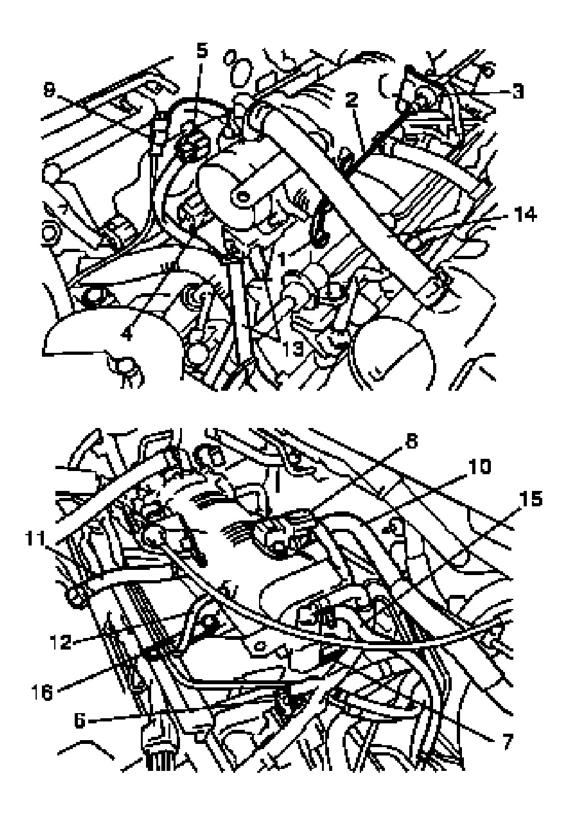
Removing Intake Manifold Front Stiffener (16)
